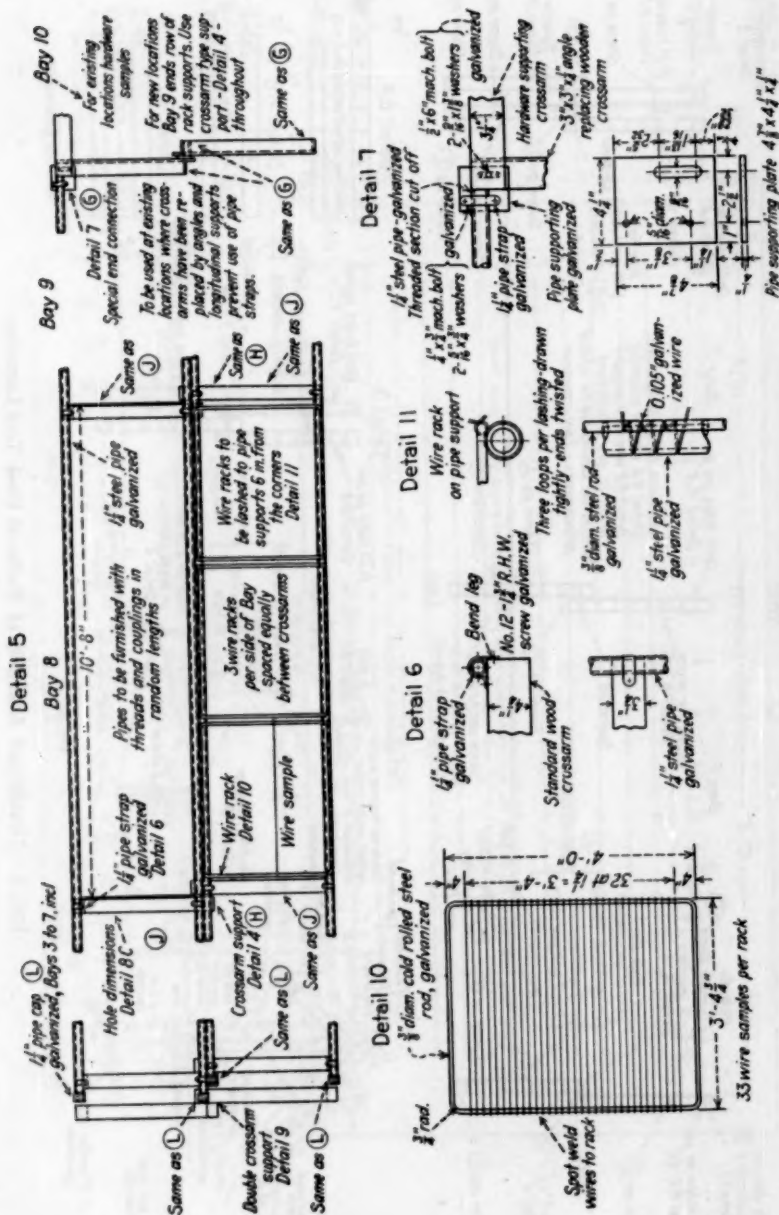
Details and Assembly of Racks at Each Test Location.
